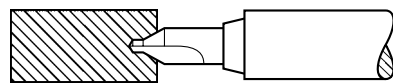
Hole cutter used for thin sheets. (Courtesy of Armstrong-Blum Manufacturing Company.)
